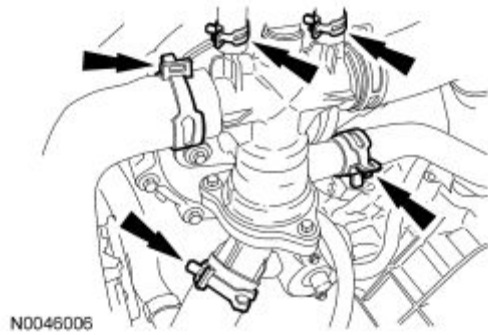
Locating Coolant Hoses At Thermostat Housing
